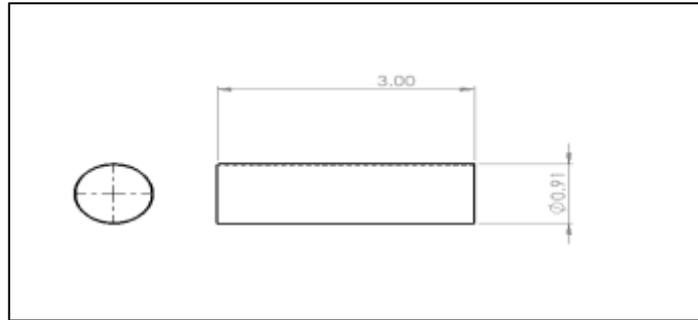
Petroleum Pipeline Drawing without Composite Coating.
